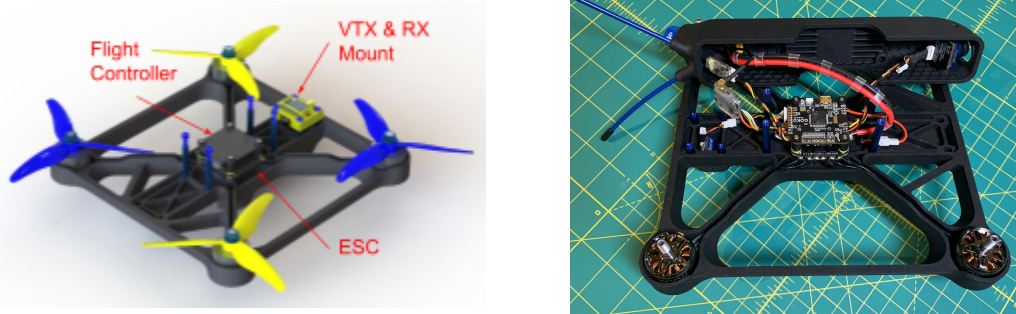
CAD Model of the frame loaded with electrical components versus the assembled frame with electrical components.
